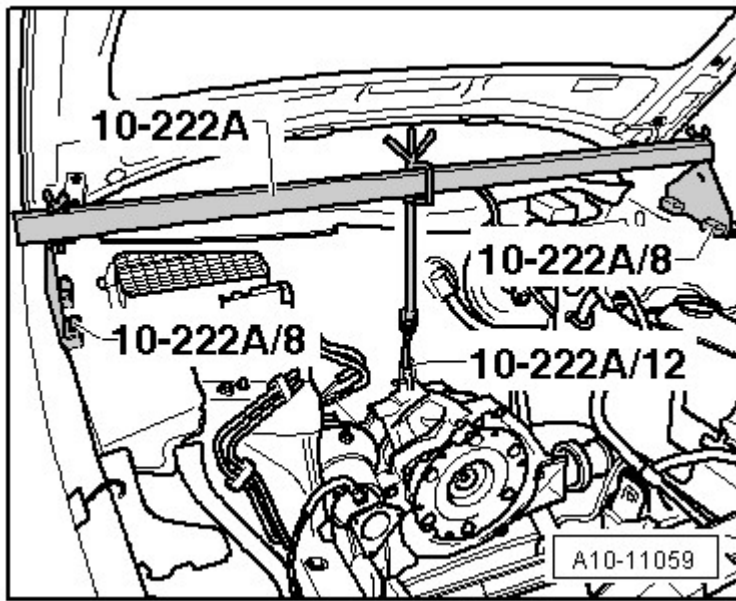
Identifying Adapter Installed On Left And Right Strut Tower
